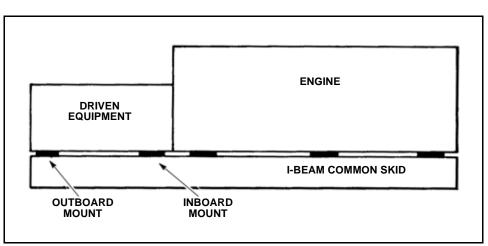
Add or Remove Shims from the Mounts on Each End of the Machine to Make Vertical Adjustments
